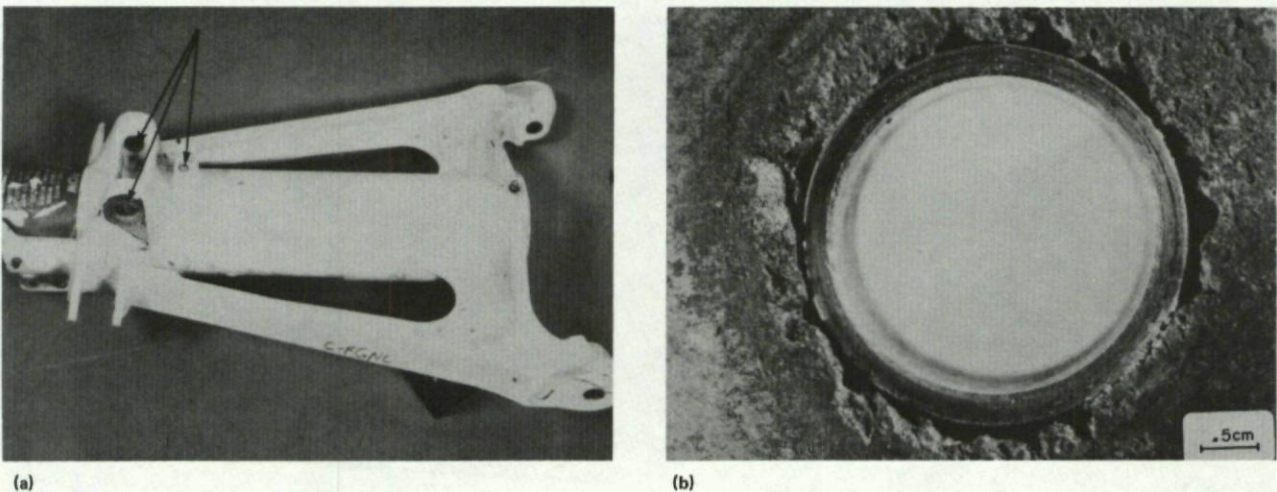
Galvanic corrosion between a steel bushing and a cast magnesium alloy nose gear strut
